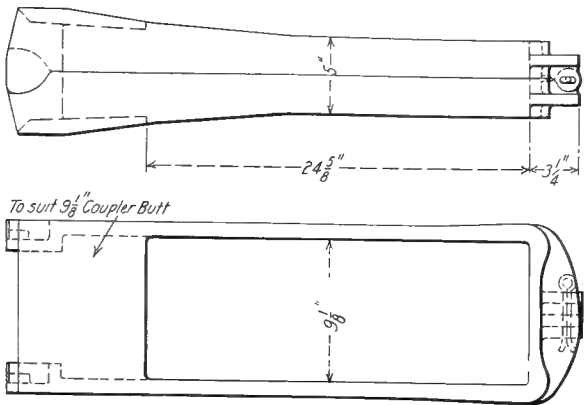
A—Miner Two-Part Cast Steel Keyless Yoke for Friction Draft Gear. W. H. Miner.
